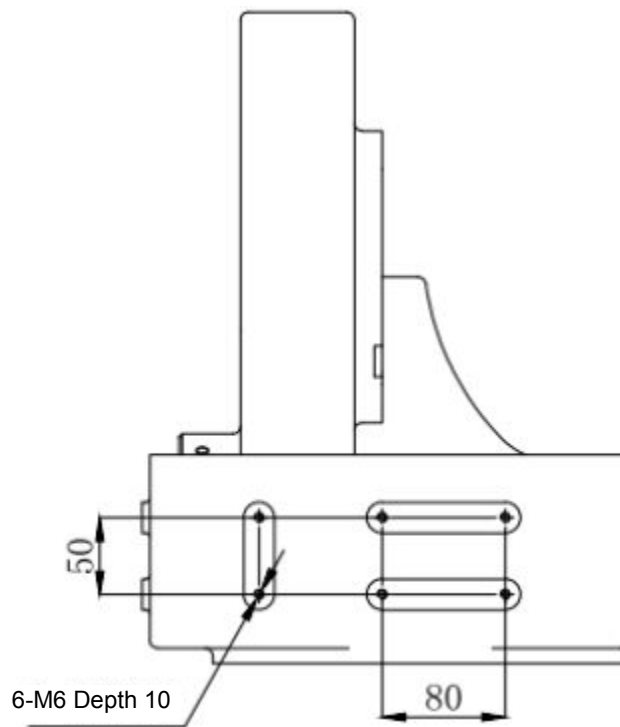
Forearm Auxiliary Mounting Hole Dimensions of SR165
